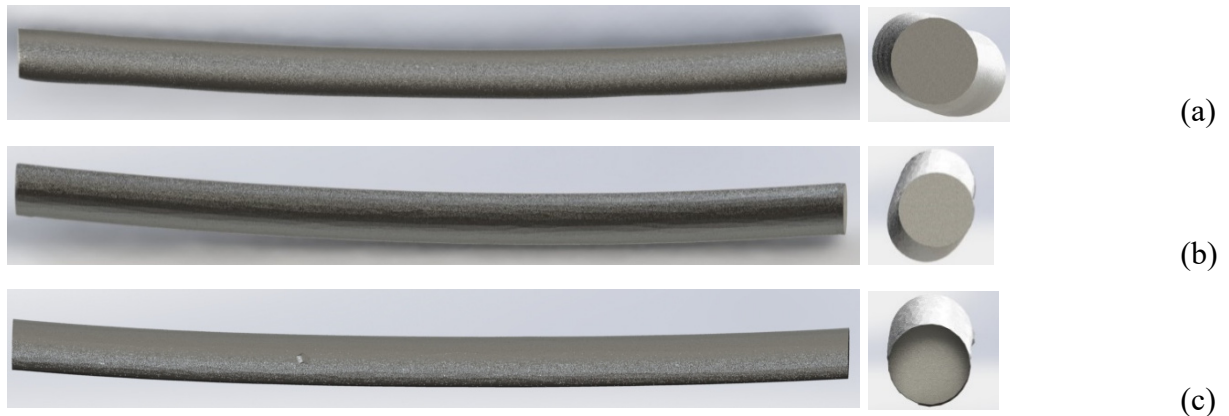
Front and side view of wire rod, (a) wire 1, (b) wire 2 and (c) wire 3
